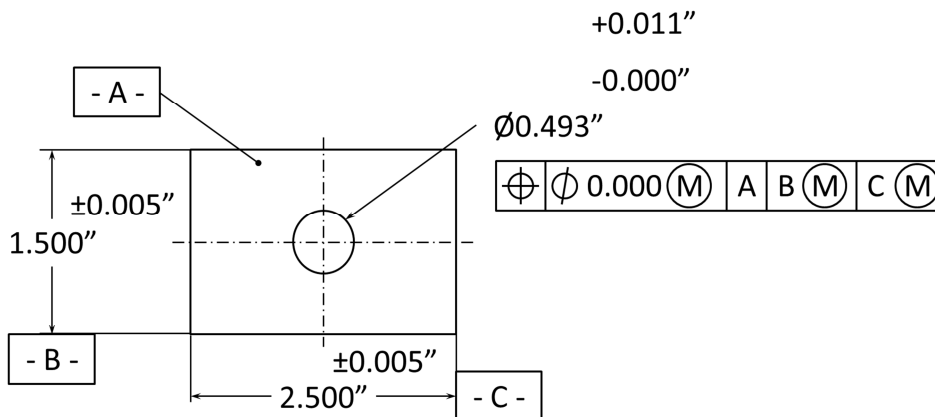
Engineering Drawing with Zero Tolerance at MMC as per ANSI Y-14.5 – 2009
